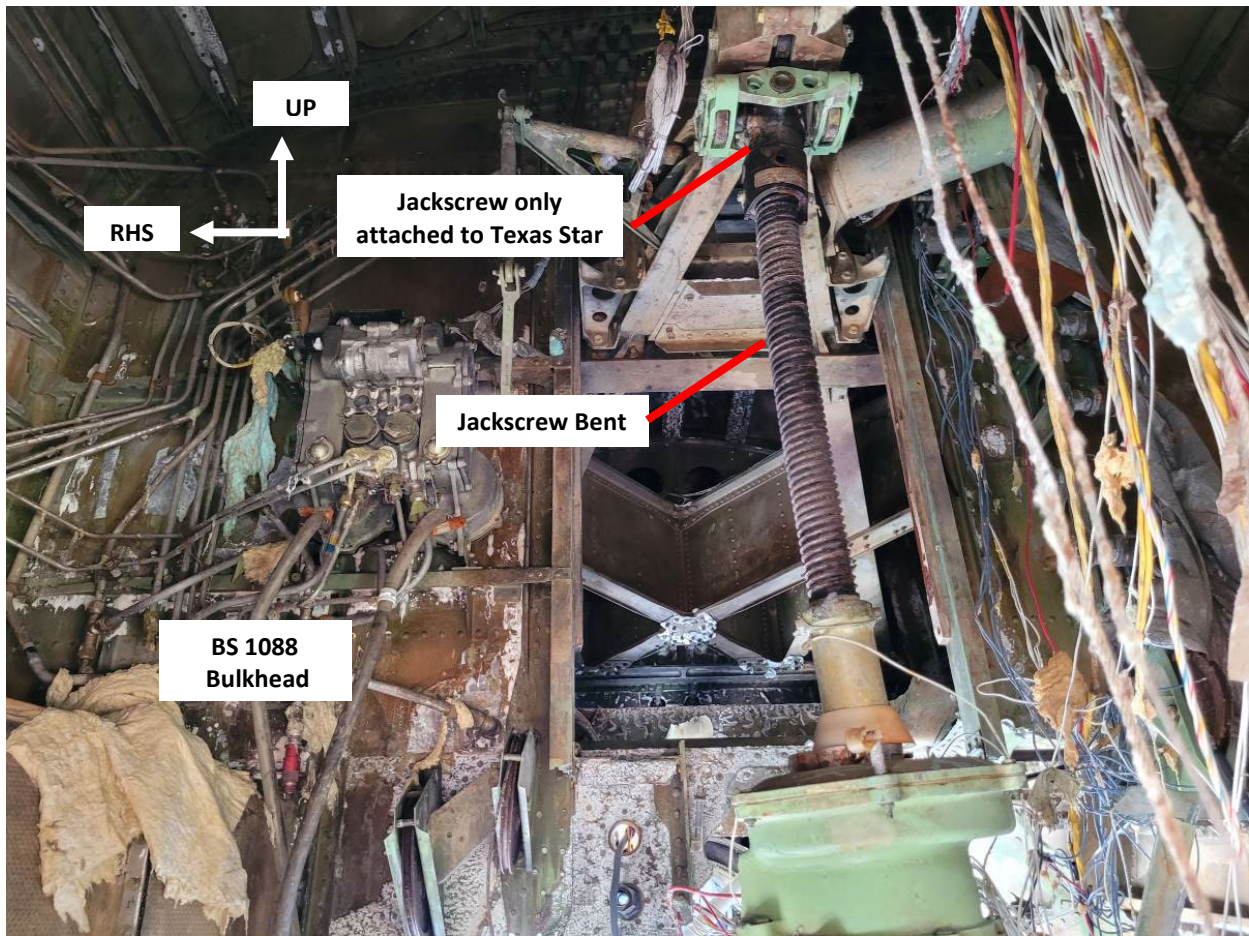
Horizontal Stabilizer Trim Jackscrew damage (Boeing photo)
